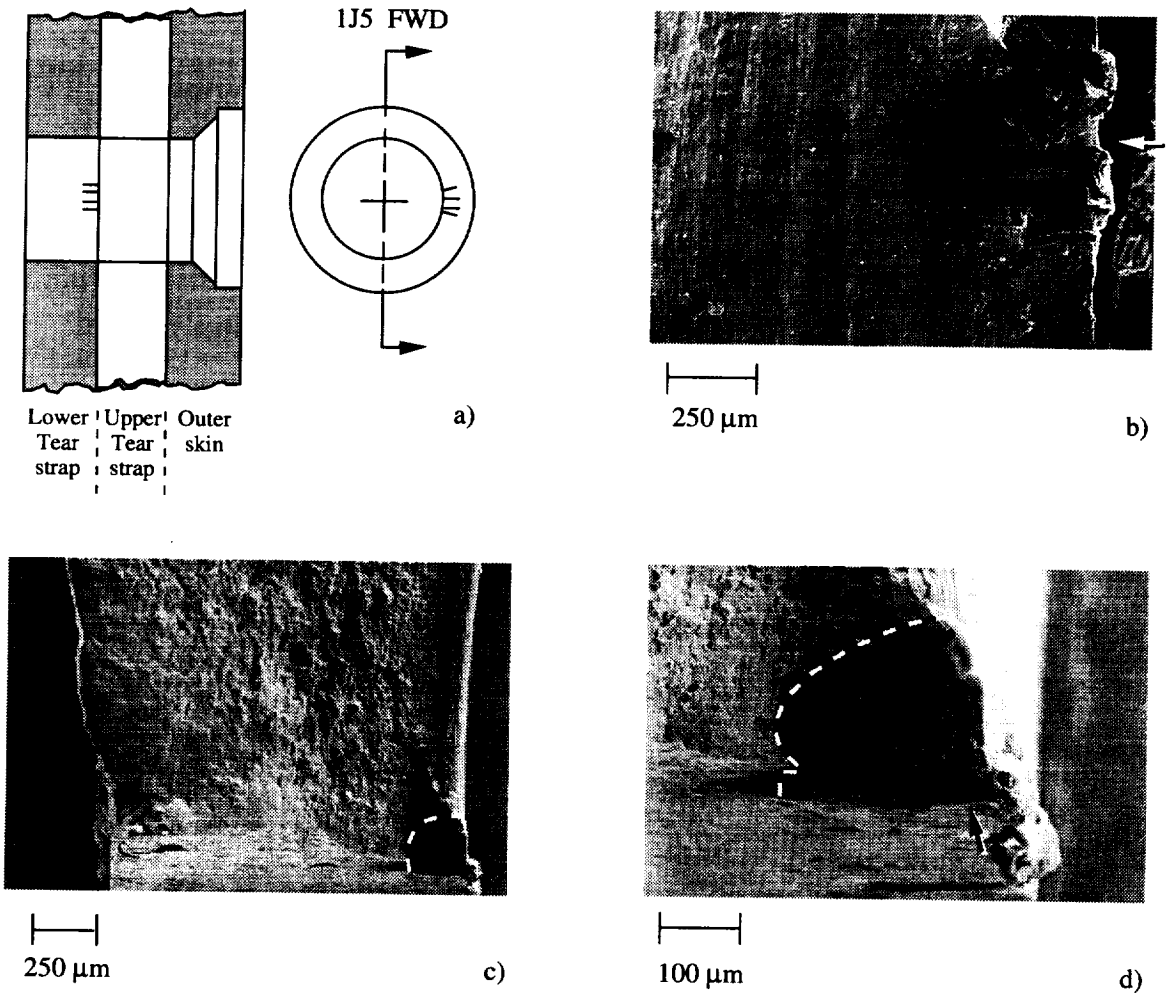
a) The schematic shows the rivet hole 1J5 configuration and the location of the multiple lower tear strap corner fatigue cracks oriented in the forward direction and about the 3 o'clock position. b) The SEM micrograph of the rivet hole surface shows the region that contains multiple corner cracks. Note the corner burrs near the likely point of crack initiation. The arrow marks the position of the fracture shown in Figures 6.22.c and 6.22.d. c) The SEM micrograph shows the fracture surface of the corner crack marked by the arrow in Figure 6.22.b. The dashed line marks the fatigue crack front. d) The SEM micrograph shows the fracture surface of the corner crack in Figure 6.22.c at higher magnification. The dashed line marks the fatigue crack front and the arrow marks the likely site of fatigue crack initiation.
